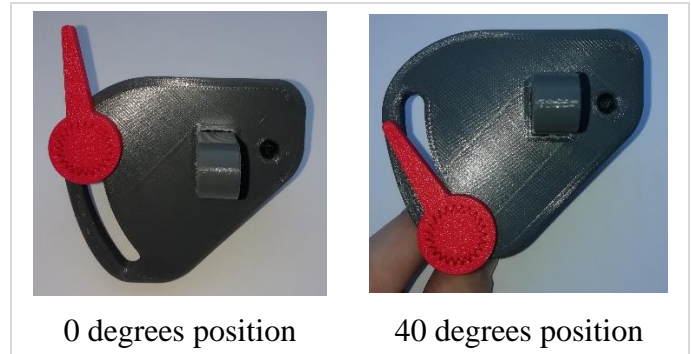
Printed Assembly with 0 and 40 Degrees Position
